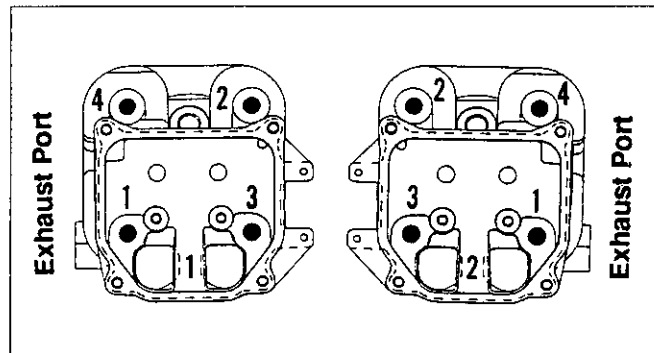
Cylinder Head Fastener Torque Sequence.
